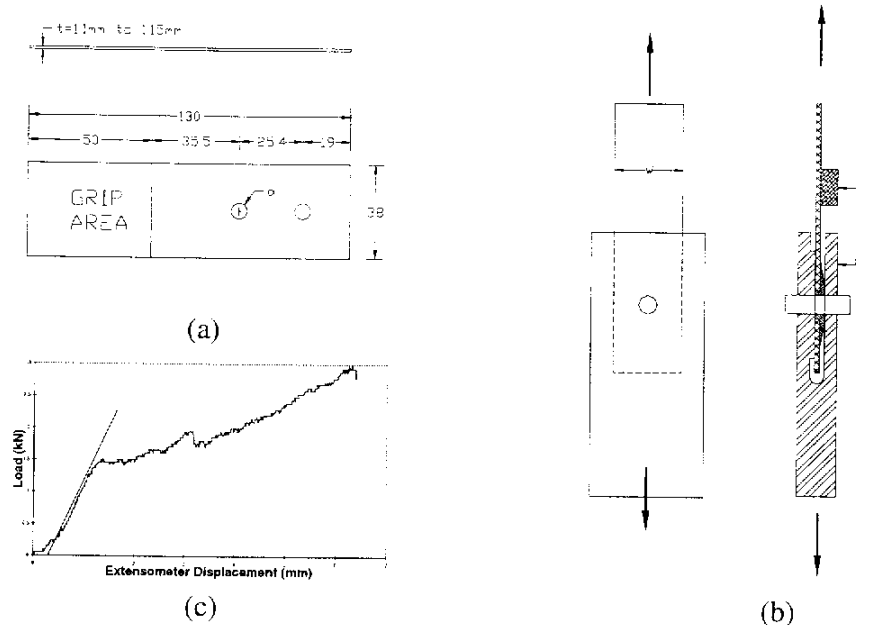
(a) Typical bearing test specimen. (b) Bearing test arrangement. (c) Load vs deflection of a typical bearing test.
